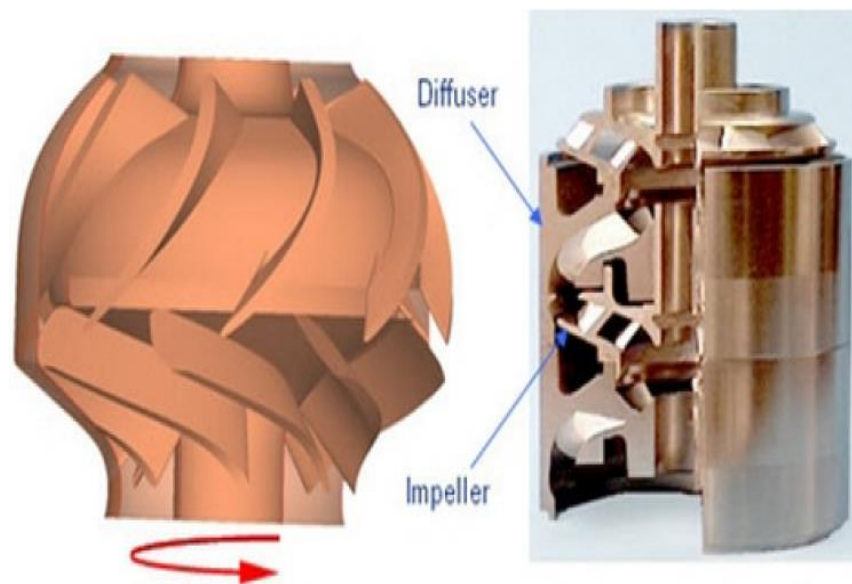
Vane Diffuser & 7 Blade Impeller [21]
